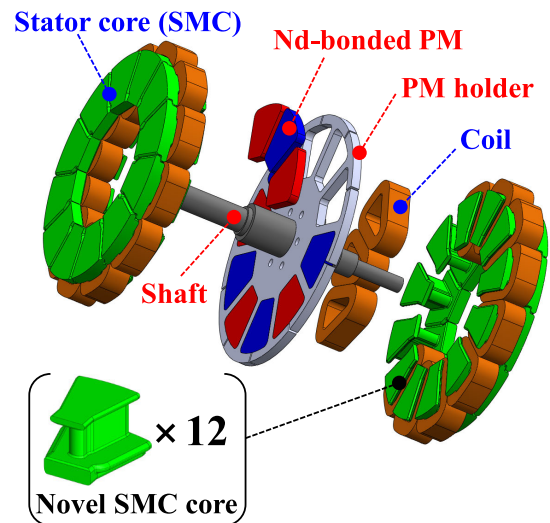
Exploded view of proposed AFPM machine employing SMC core with tooth-tips constructed by one pressing process.
